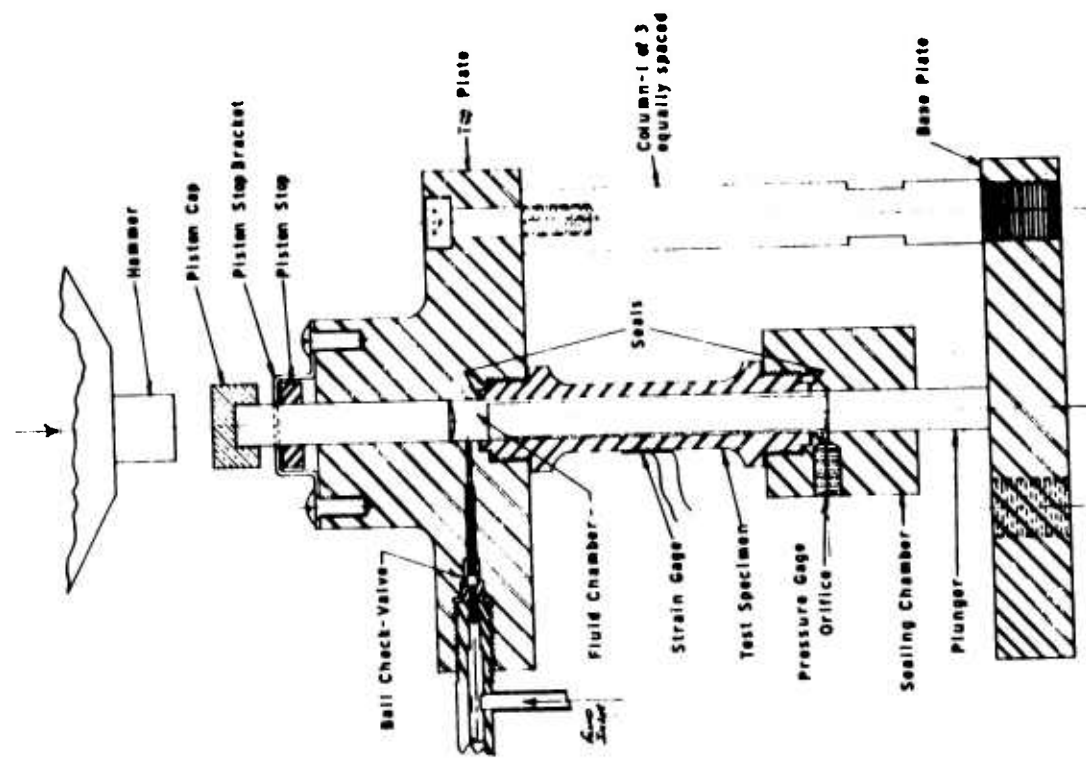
SPECIMEN HOLDING ASSEMBLY OR ANVIL
